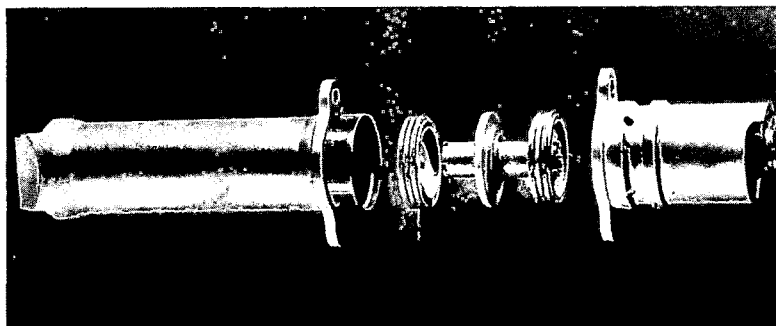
Afterburner activating cylinder assembly for the J75 jet engine. These APM parts are used at temperatures as high as 900°F. Courtesy Aluminum Company of America.
